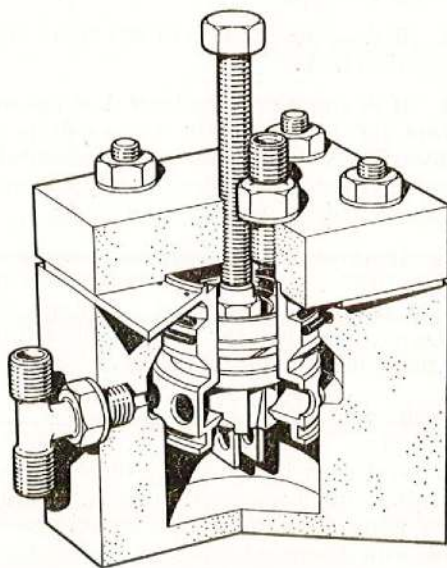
Testing the servo piston rings for leakage (fixture 258797)
